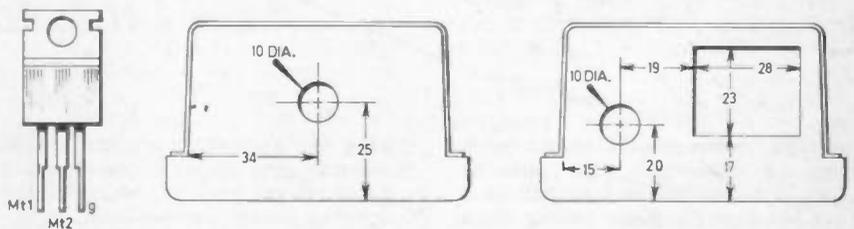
Drilling and cut-out details of the case and the pin configuration of the triac CSR1.
